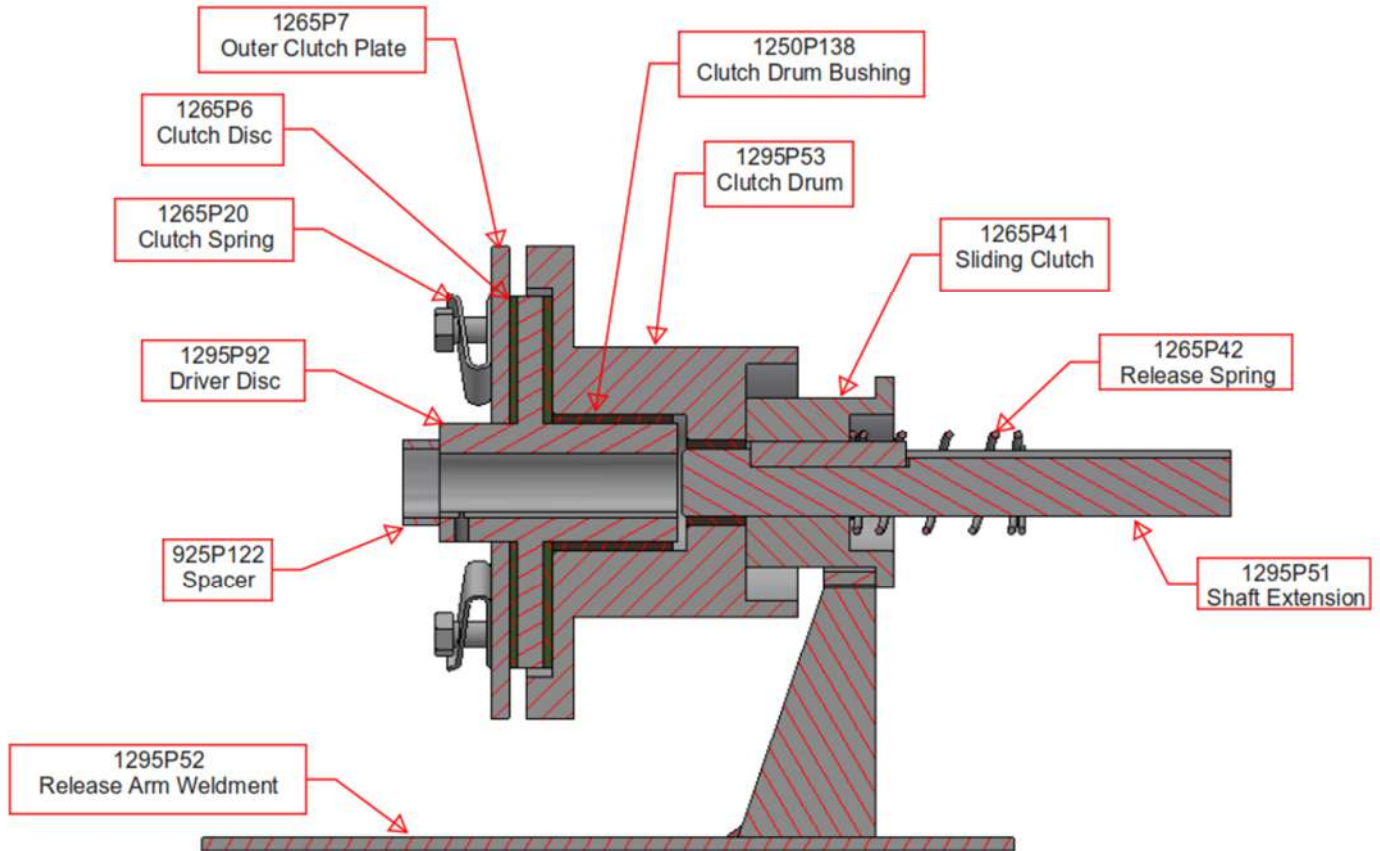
Illustration of Parts: Sectional Detail View of Clutch Assembly
